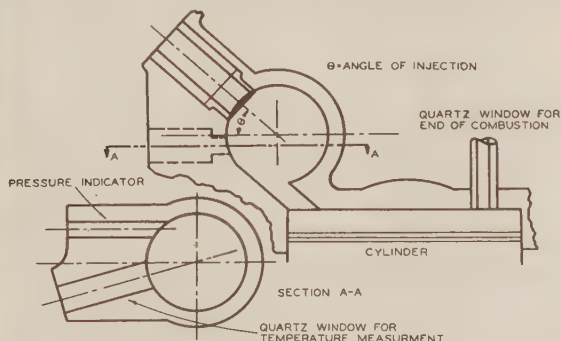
SCHEMATIC DRAWING OF ENGINE HEAD
